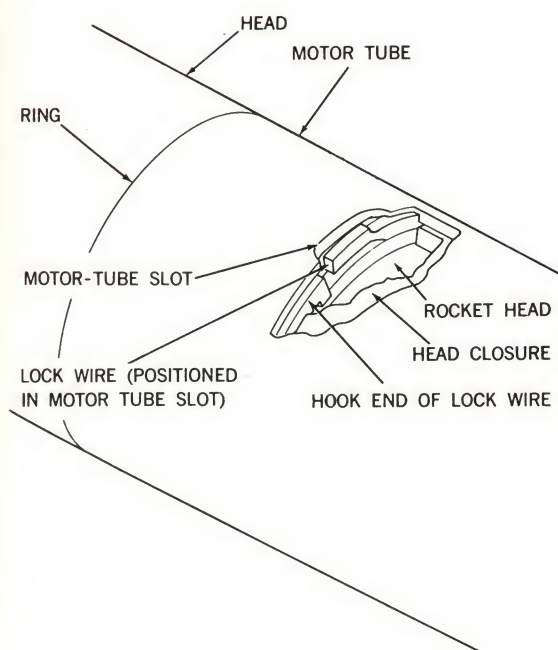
2.75-Inch Rocket Motor Tube Lockwire Slot, Cutaway View.
